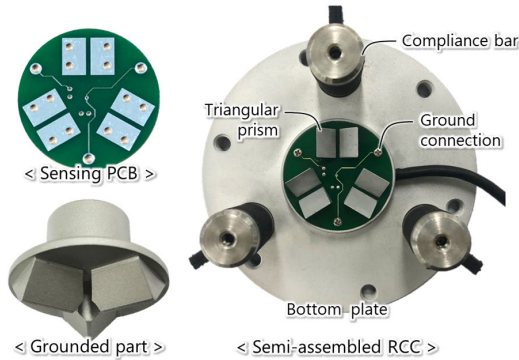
Sensing printed circuit board (PCB), grounded part of developed sensor, and partially assembled RCC with integrated sensor.
